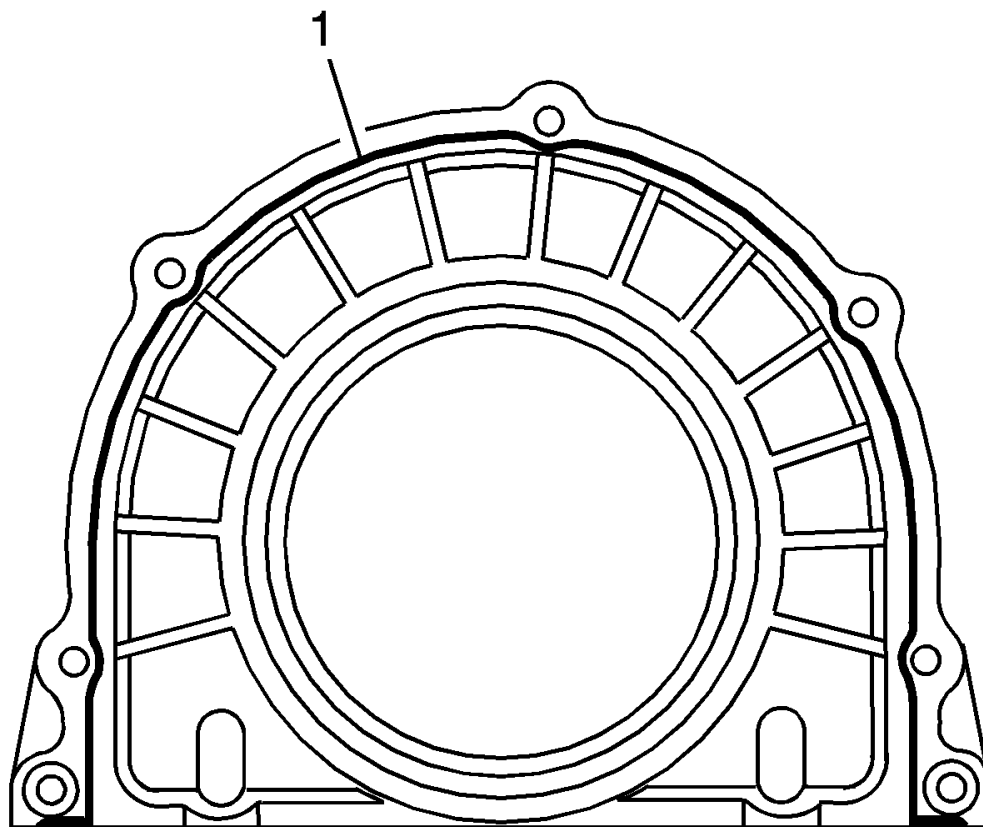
RTV Sealant On Crankshaft Rear Oil Seal Housing
